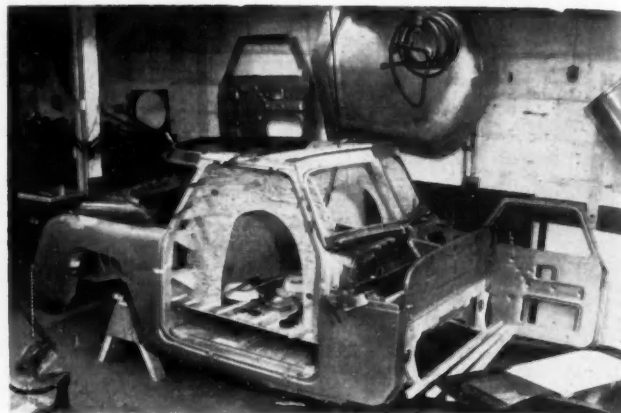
Assembly accomplished on temporary wooden jigs, using clamping devices for further support
